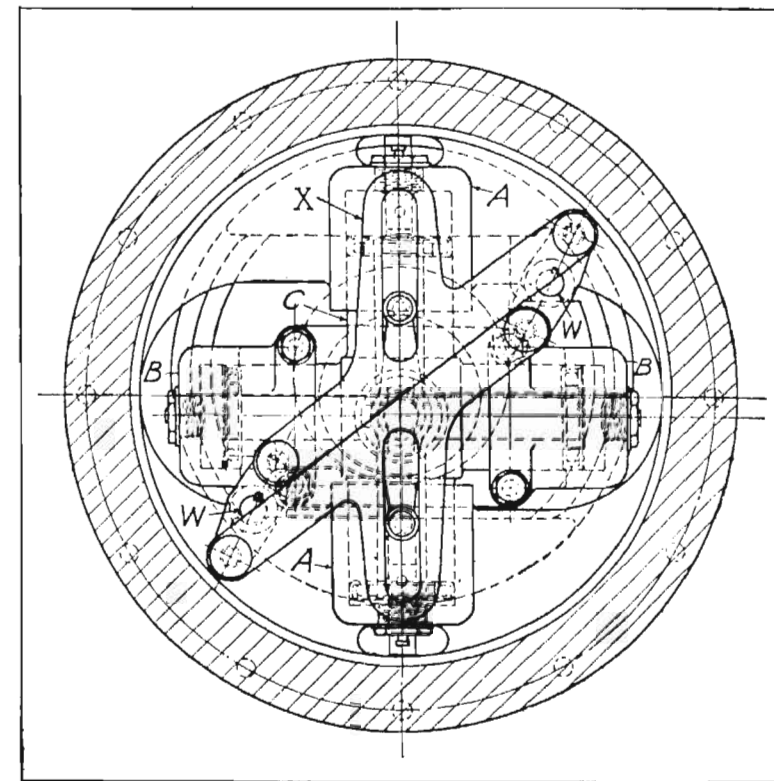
End View, Showing Arrangement of the Cylinders and Pistons of the "Fluid Clutch"
